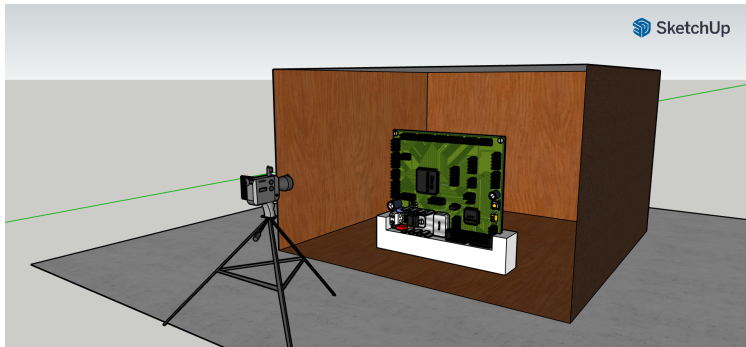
Fully Automated Smart Inspection System (Front View)
